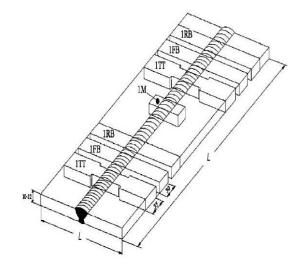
Butt weld tests for welding in various positions
